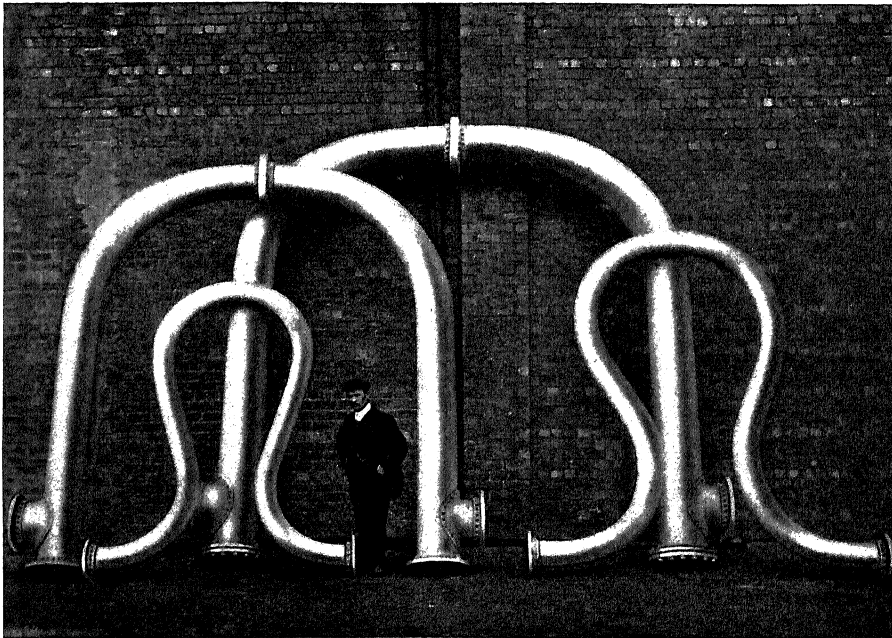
6-in., 8-in., and 14-in. Expansion Bends for H.P. Steam
